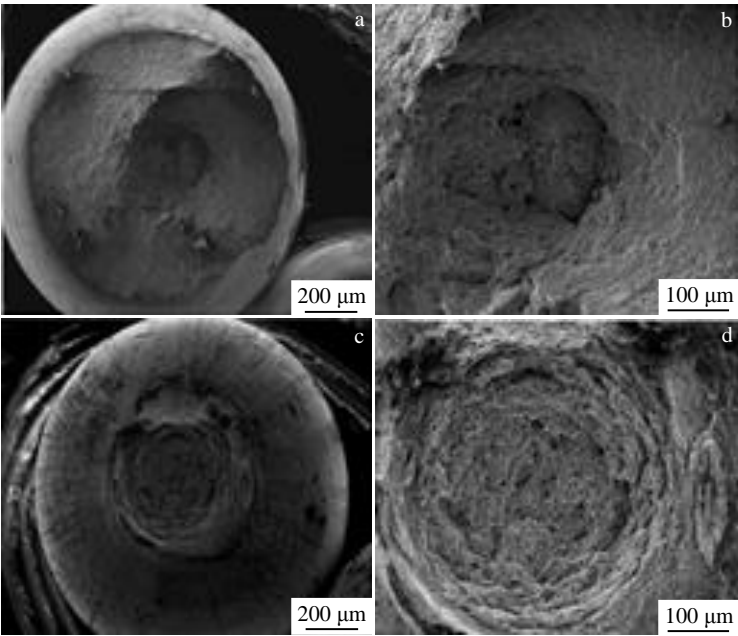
Fracture morphologies of SAL5356 (a, b) and ER5356 (c, d) welding wires
